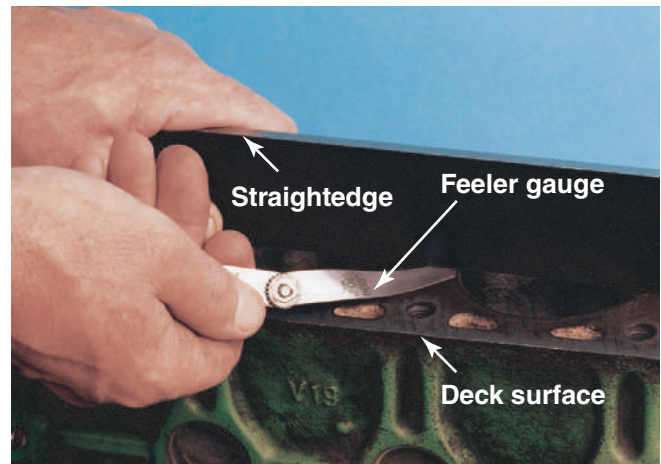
Checking for deck warpage with a straightedge and feeler gauge.
